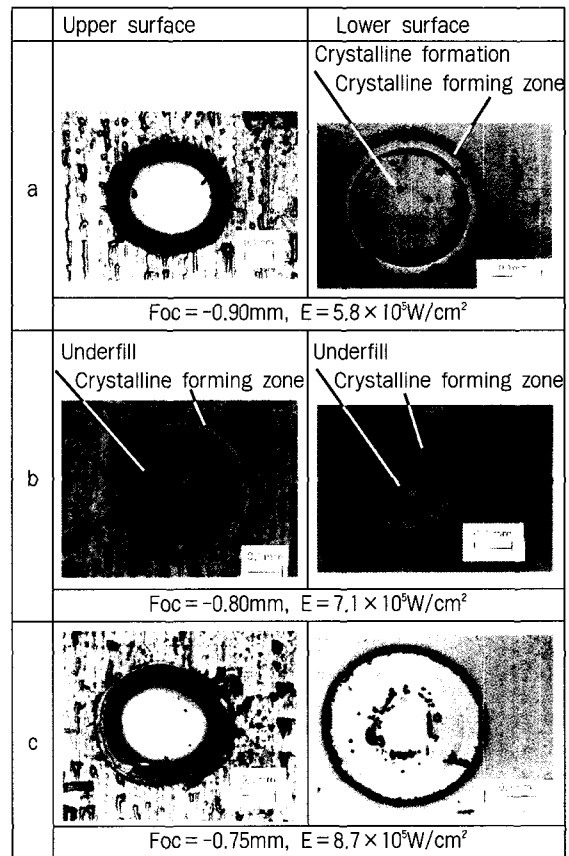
Surface of welding point (4-foils,  $Q_p=80$  mJ,  $\tau_p=0.1$  ms)
